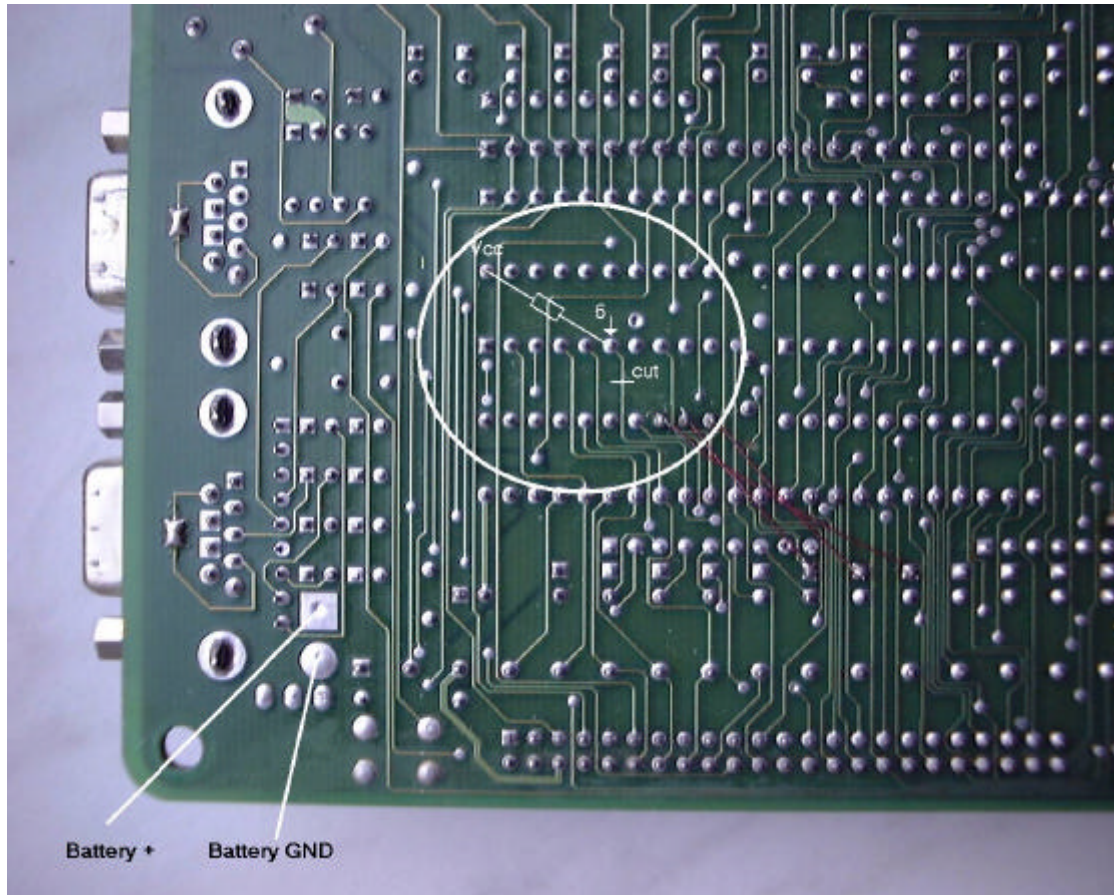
The same spot viewed from below, line to be cut and resistor to be soldered in
